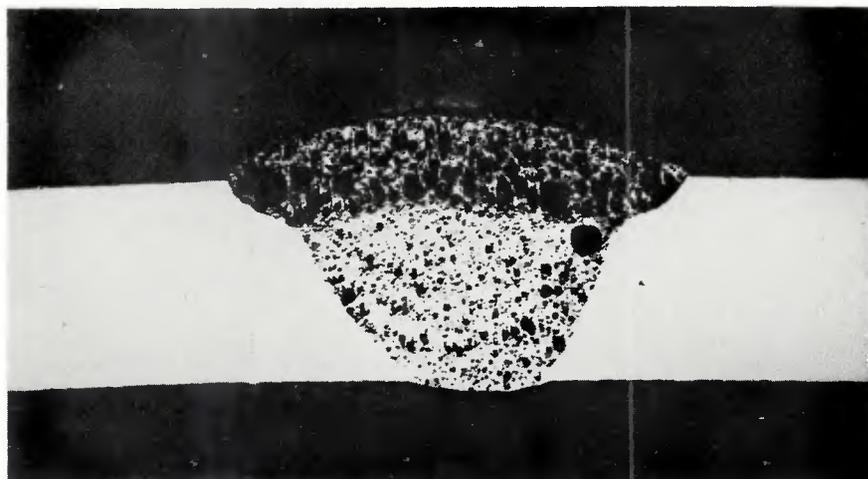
Macrograph of OFHC Copper weld metal produced with nitrogen shielding gas showing coarse porosity at surface and fine porosity in the interior. X10, reduced 11%
